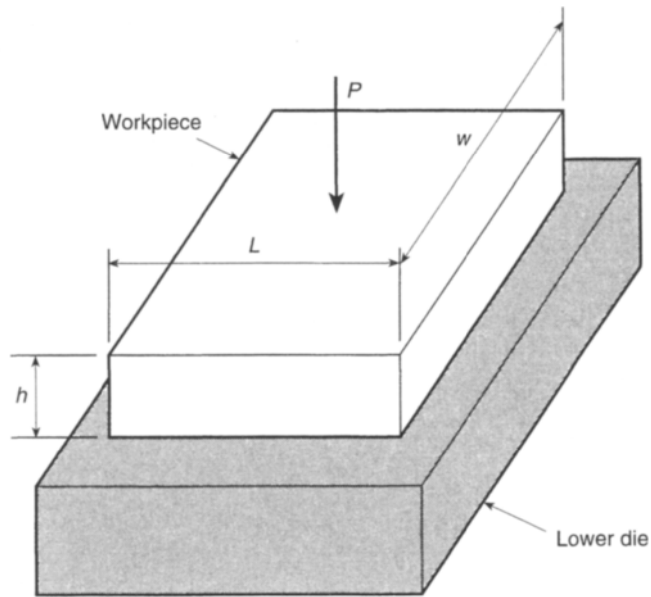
Dimensional system for forging of rectangular workpieces.
